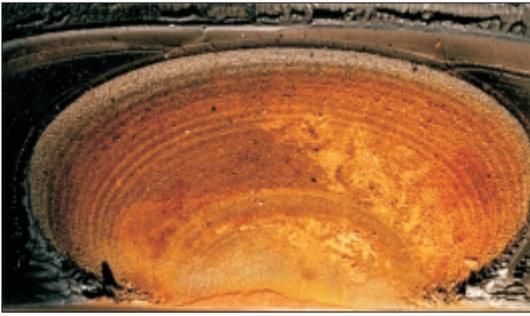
Fracture surface in a PE-Pipe subjected to internal pressure only
